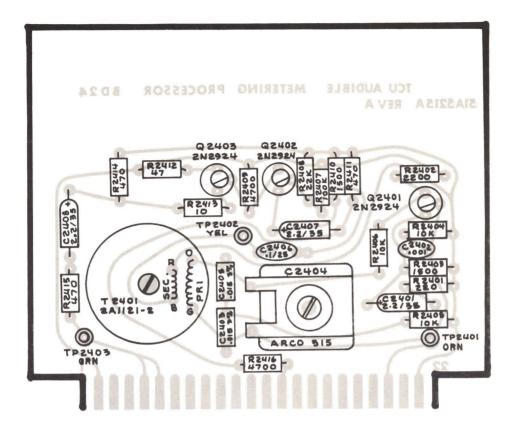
TCU Audible Metering Processor (Board 24), Parts Location
